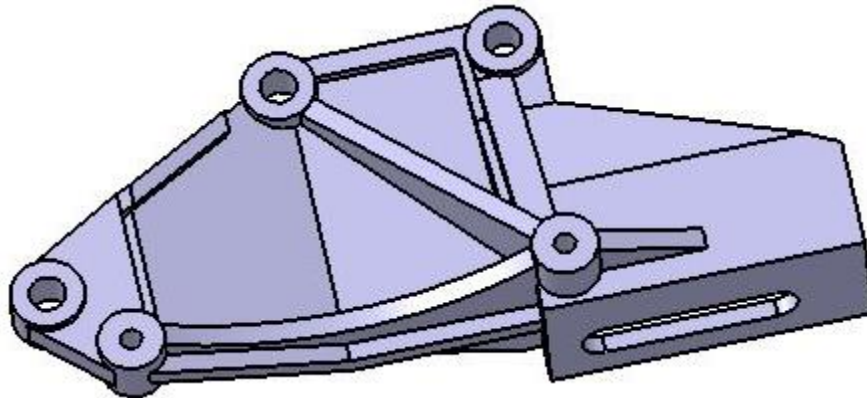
3D CAD model of Compressor Mounting Bracket
